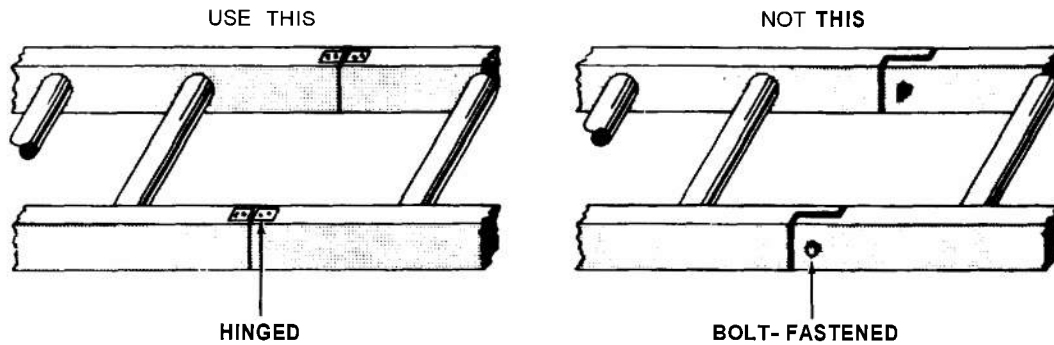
Assembling Two-Section Extension Ladders (Ref. 1)
